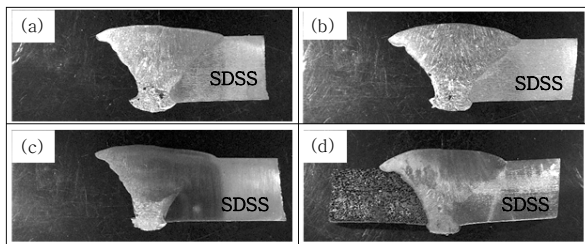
Pitting corrosion tested surfaces (Test solution : 6%FeCl₃) (a) 50℃, (b) 45℃, (c) 40℃, (d) 35℃
